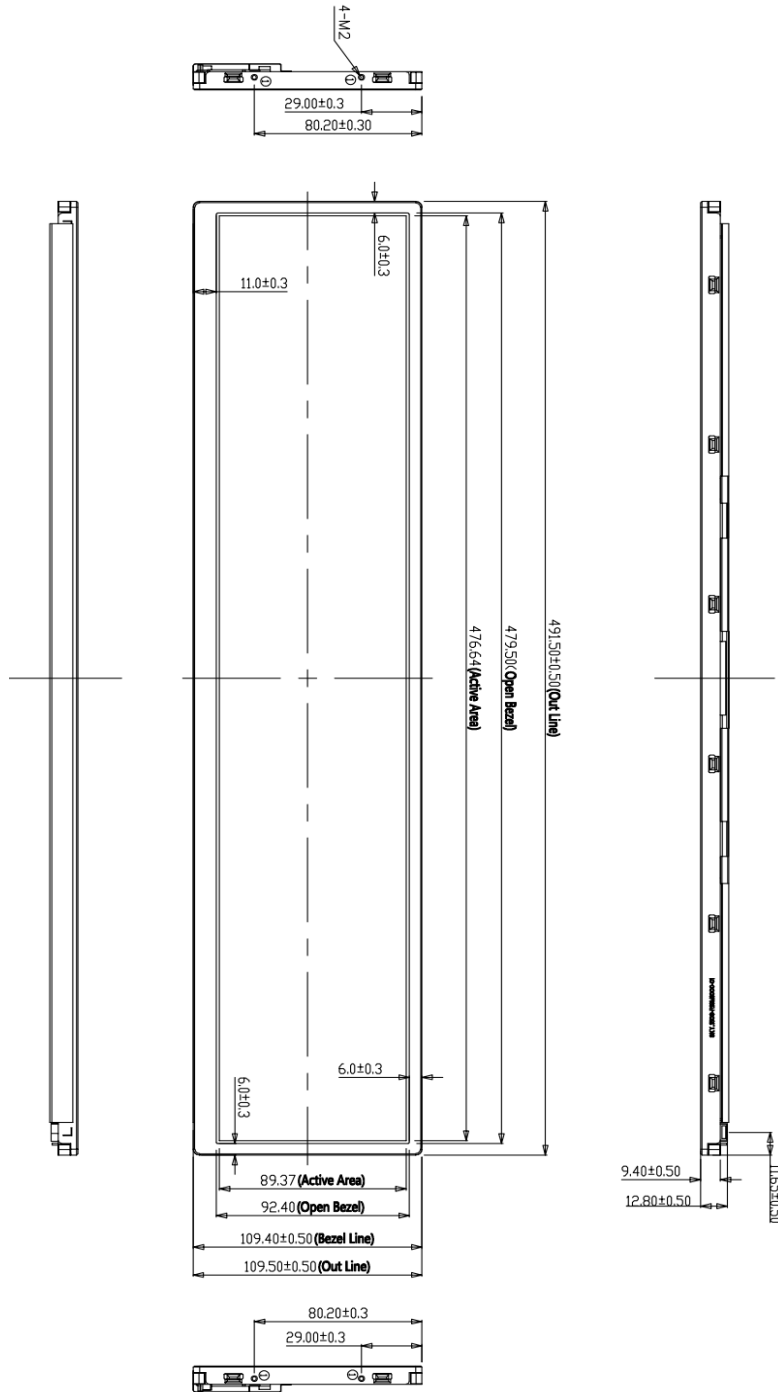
TFT-LCD Module Outline Dimensions (Rear view)
